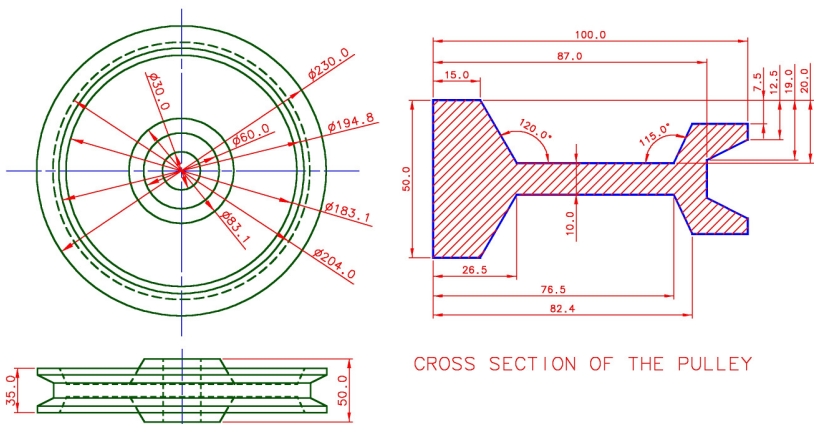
Plastic pulley geometry and dimensions, in millimeters.
